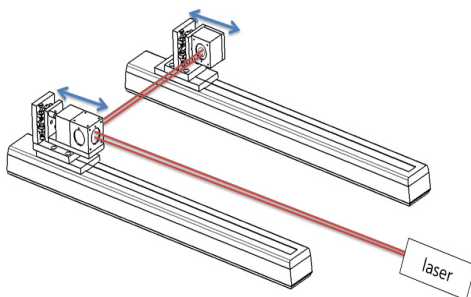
Configuration of parallelism measurement using a laser interferometer
